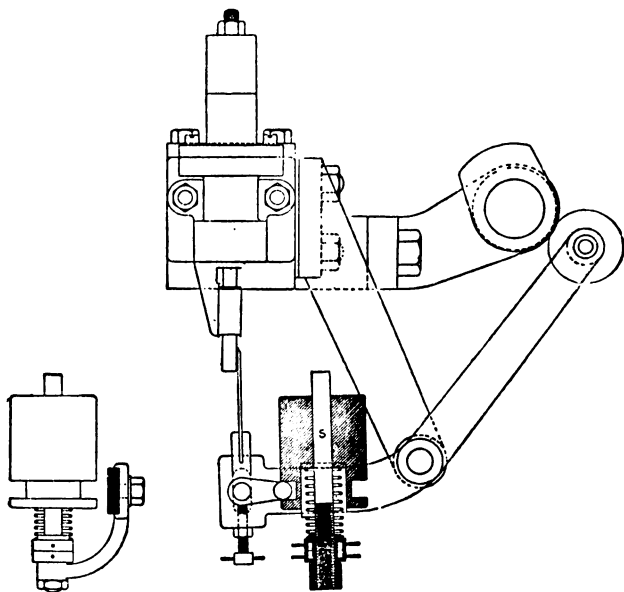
"Stockport" Gas Engine—Arrangement of Governor for Small Engines.
